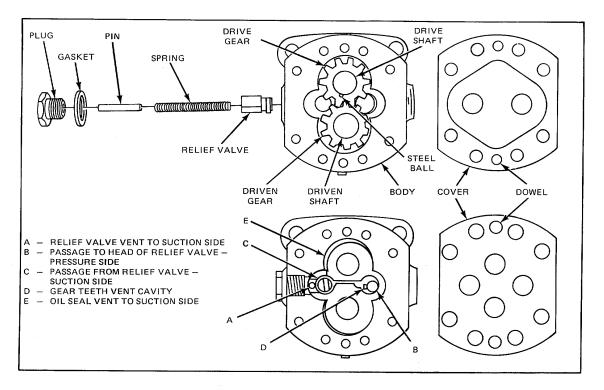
Fuel Pump Valving and Rotation (Right Hand Pump Shown).
